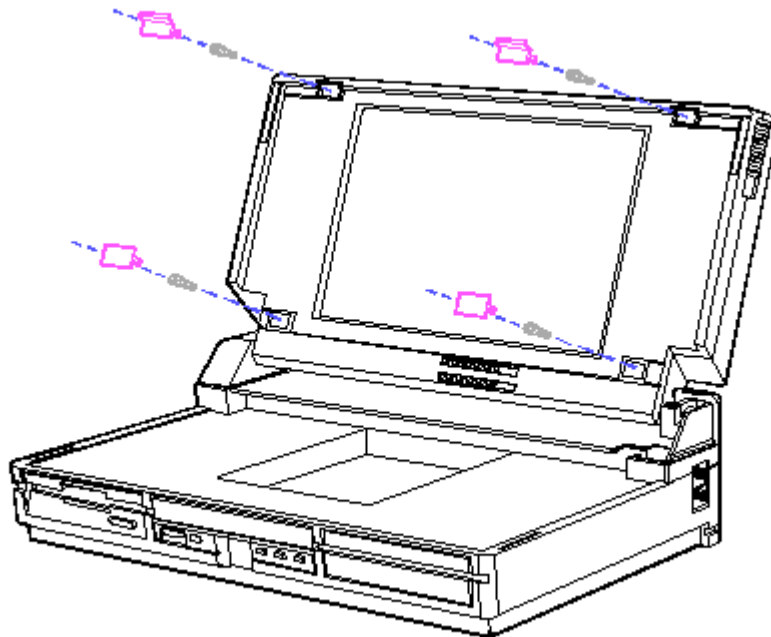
Removing the Screw Covers and Screws from the LCD Panel
